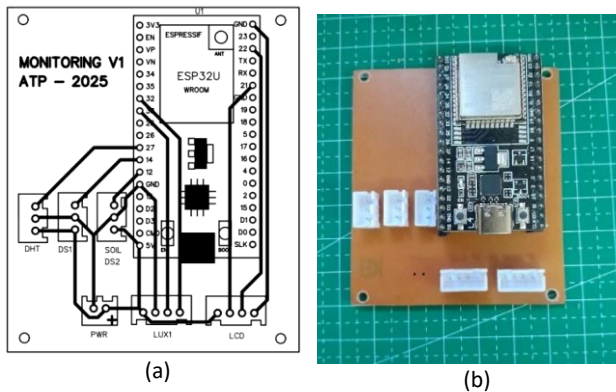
Layout of PCB: (a) PCB design and (b) fabrication
